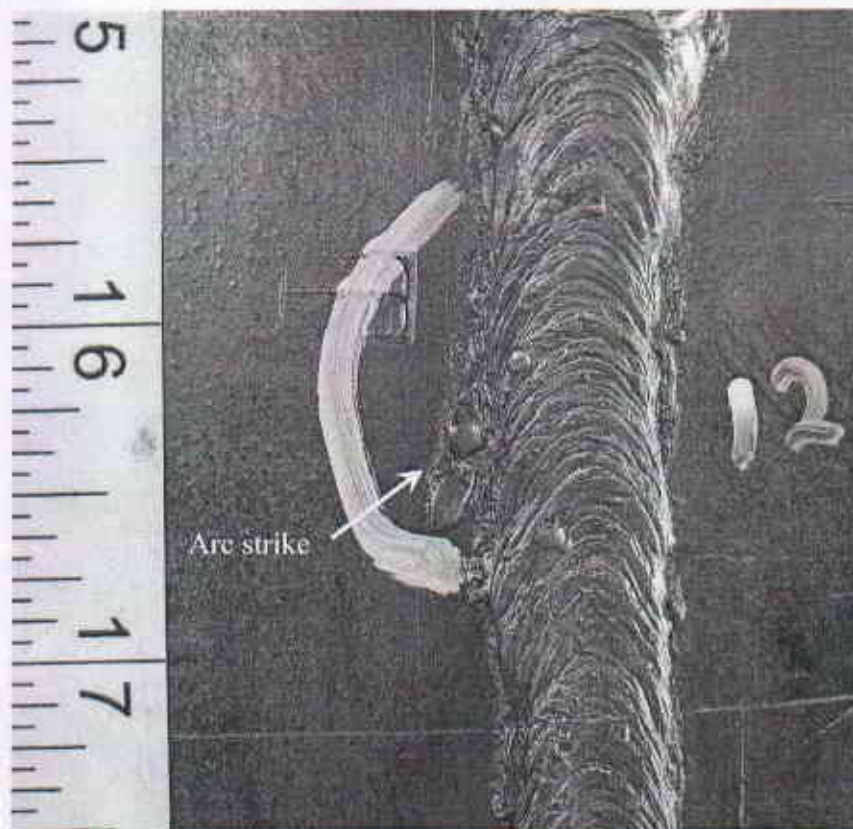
Photograph of Sample 1 showing workmanship imperfection (arc-strike of weld). Scale shown is in inches.
